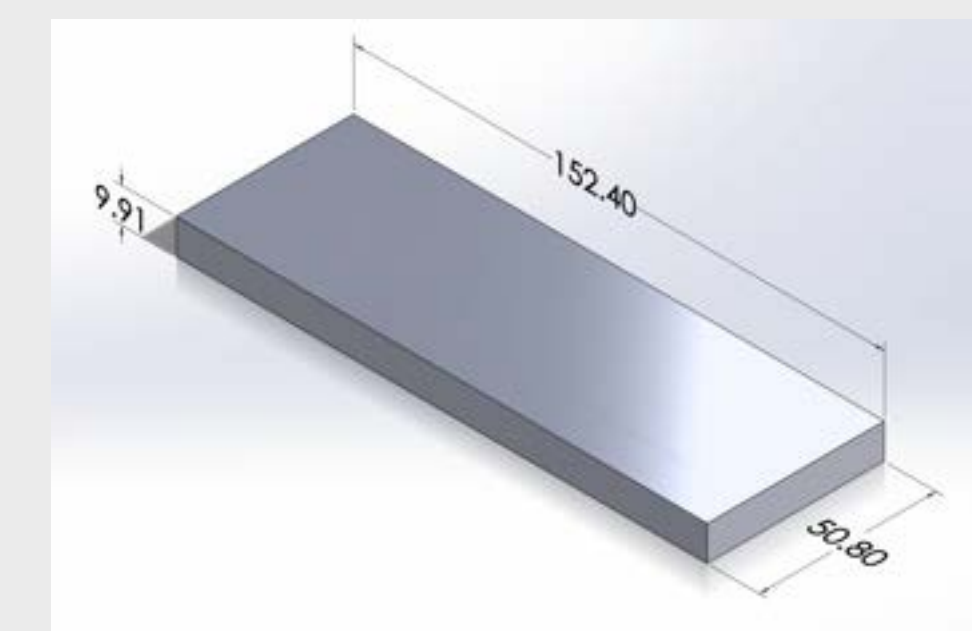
SolidWorks model of heel support plate. Dimensions in mm.
